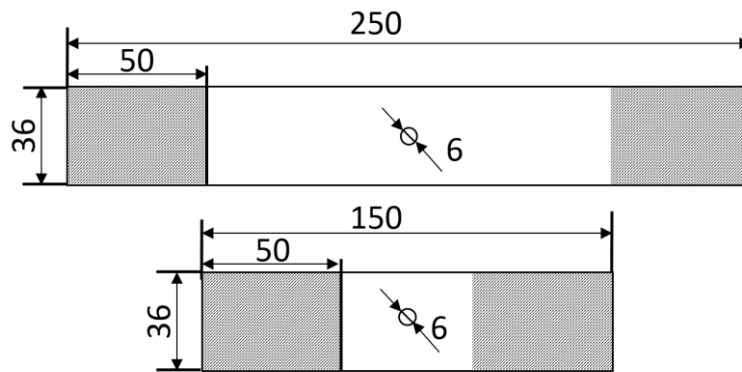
Specimen shapes. Top: tensile specimen. Bottom: compression specimen. The grey area is the clamped area
